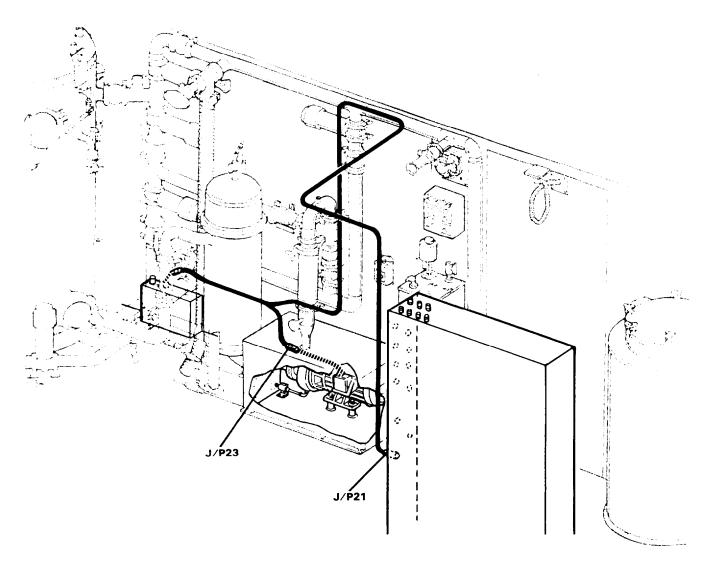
Electrical Installation (sheet 7 of 8) Primary Harness, Front Wail, W-33
